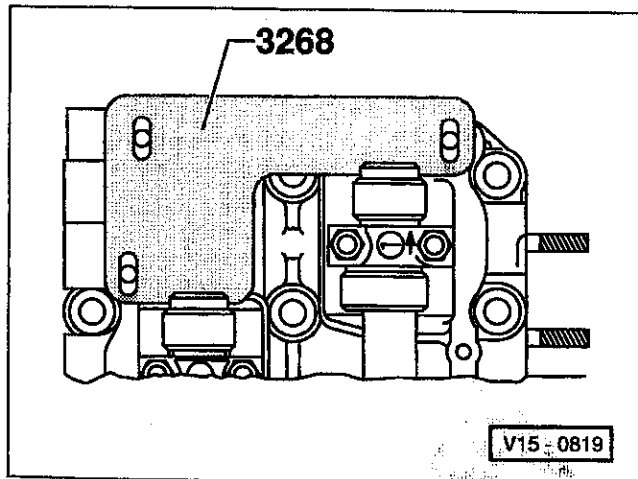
VW special tool no. 3268 aligns camshafts at TDC. Tool engages slots in rear of camshafts.
